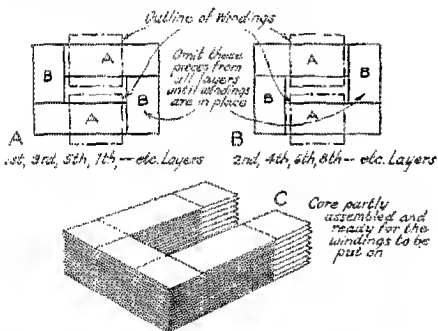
HOW TO PUT A TRANSFORMER CORE TOGETHER.
